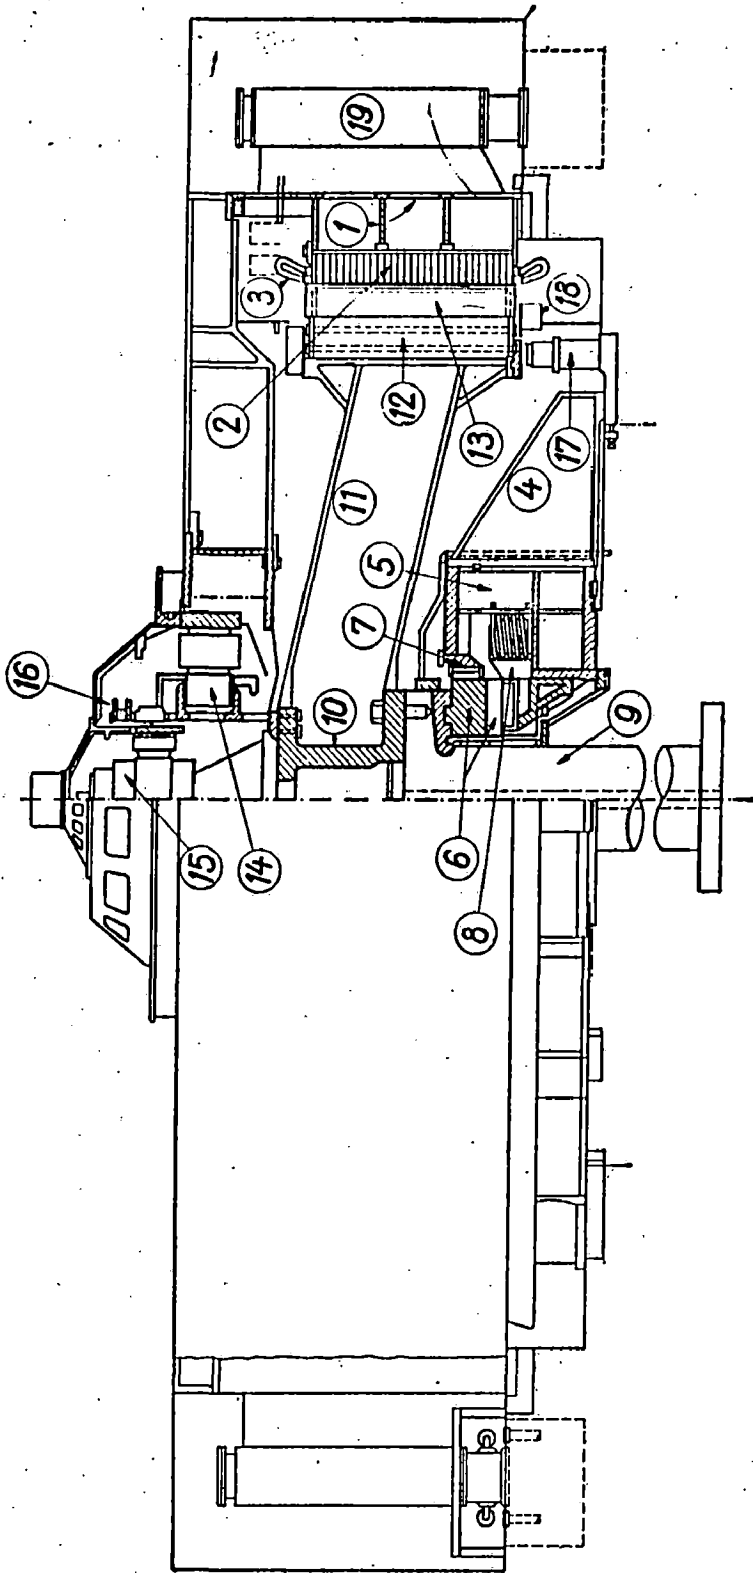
A vertical-type generator (*Westinghouse Electric Corp.*): 1 — stator case, 2 — stator core, 3 — stator windings, 4 — spider, 5 — oil tank, 6 — thrust bearing, 7 — guide bearing, 8 — oil cooler (coil type), 9 — shaft, 10 — rotor hub, 11 — rotor arm, 12 — rotor rim, 13 — pole, 14 — exciter, 15 — pilot exciter, 16 — slip ring, 17 — brake, 18 — cooling blower, 19 — air cooler. (After R. A. Hopkins, in *Hydroelectric Handbook* by W. P. Creager and J. D. Justin)
